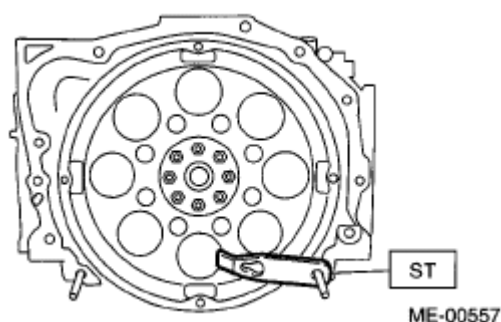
Identifying ST 498497100 Crankshaft Stopper
